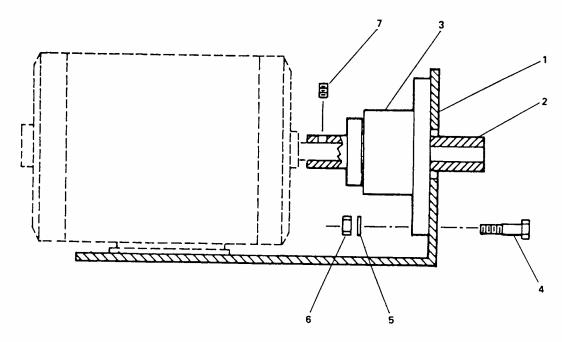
Motor Mount Assembly, Model BB2016 (Serial No. 20S-77-000 and Below)
